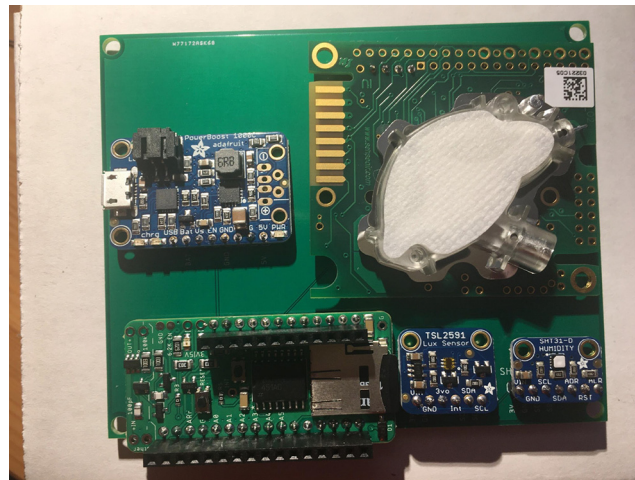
Top view after soldering the CO₂ Sensor to the PCB.
